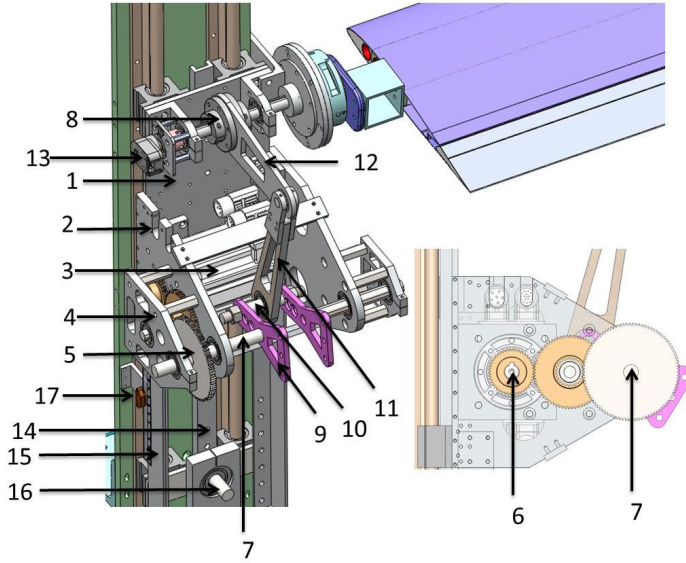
Pitch Module detailed view. Major components: 1.Back plate, 2.Wall, 3.Pitch actuator, 4.Mini wall, 5.Gearbox, 6.Motor shaft, 7.Drive shaft, 8.Wing shaft, 9.Crank, 10.Drive pin, 11.Connecting rod, 12.Wing bar, 13.Spine, 14.Extension channel, 15.Plunge encoder
